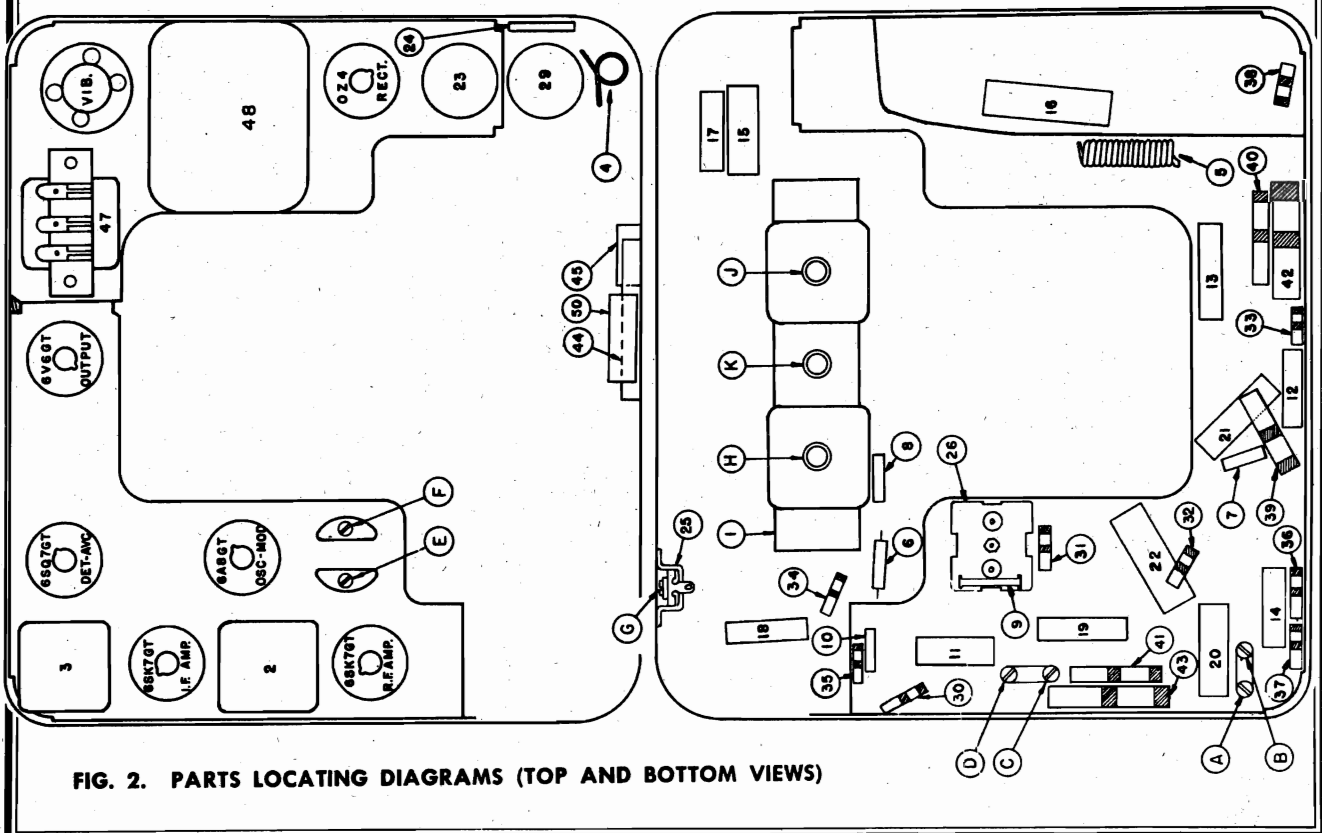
PARTS LOCATING DIAGRAMS (TOP AND BOTTOM VIEWS)
